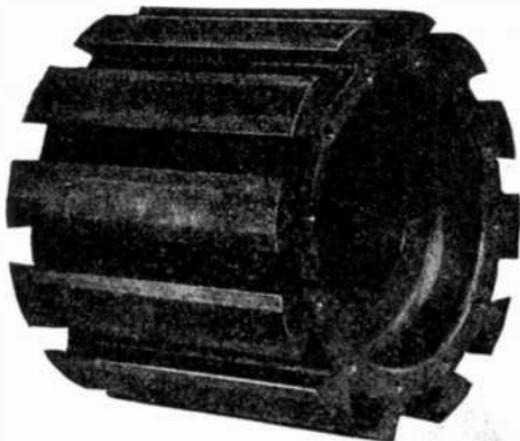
,268.—Wagner cast steel hub with dovetail grooves for attaching the revolving field magnets. Such construction is generally used on machines of small and medium size.
